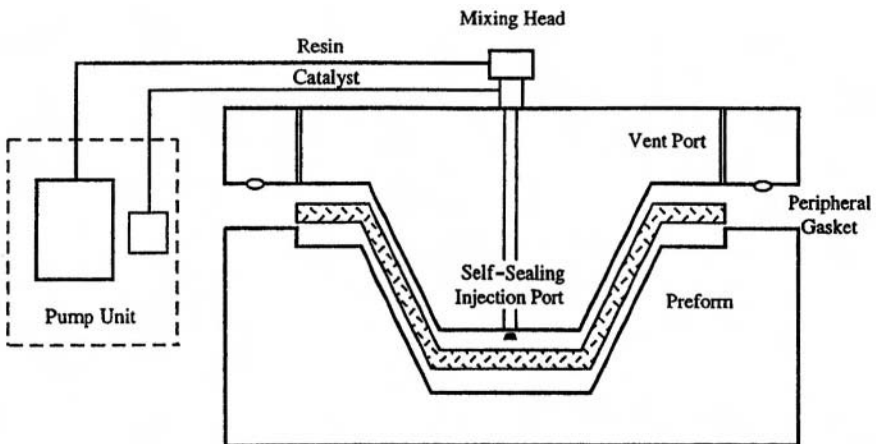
Schematic of a resin transfer molding process. Taken from Fong and Advani (1998), p. 433.
